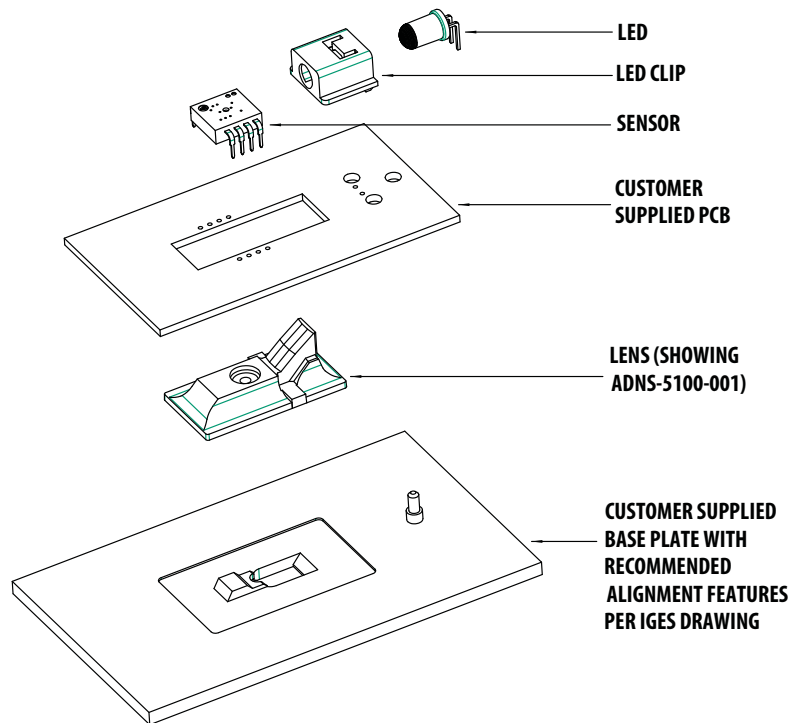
Exploded view drawing of optical tracking engine with ADNS-5050 optical mouse sensor.
